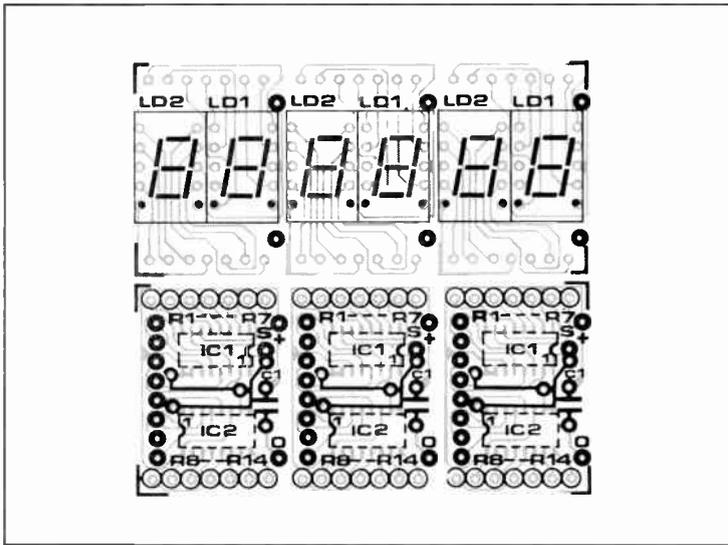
Printed circuit board for the 5-digit address readout. The surface-mount assembly (SMA) ICs are fitted at the track side.
